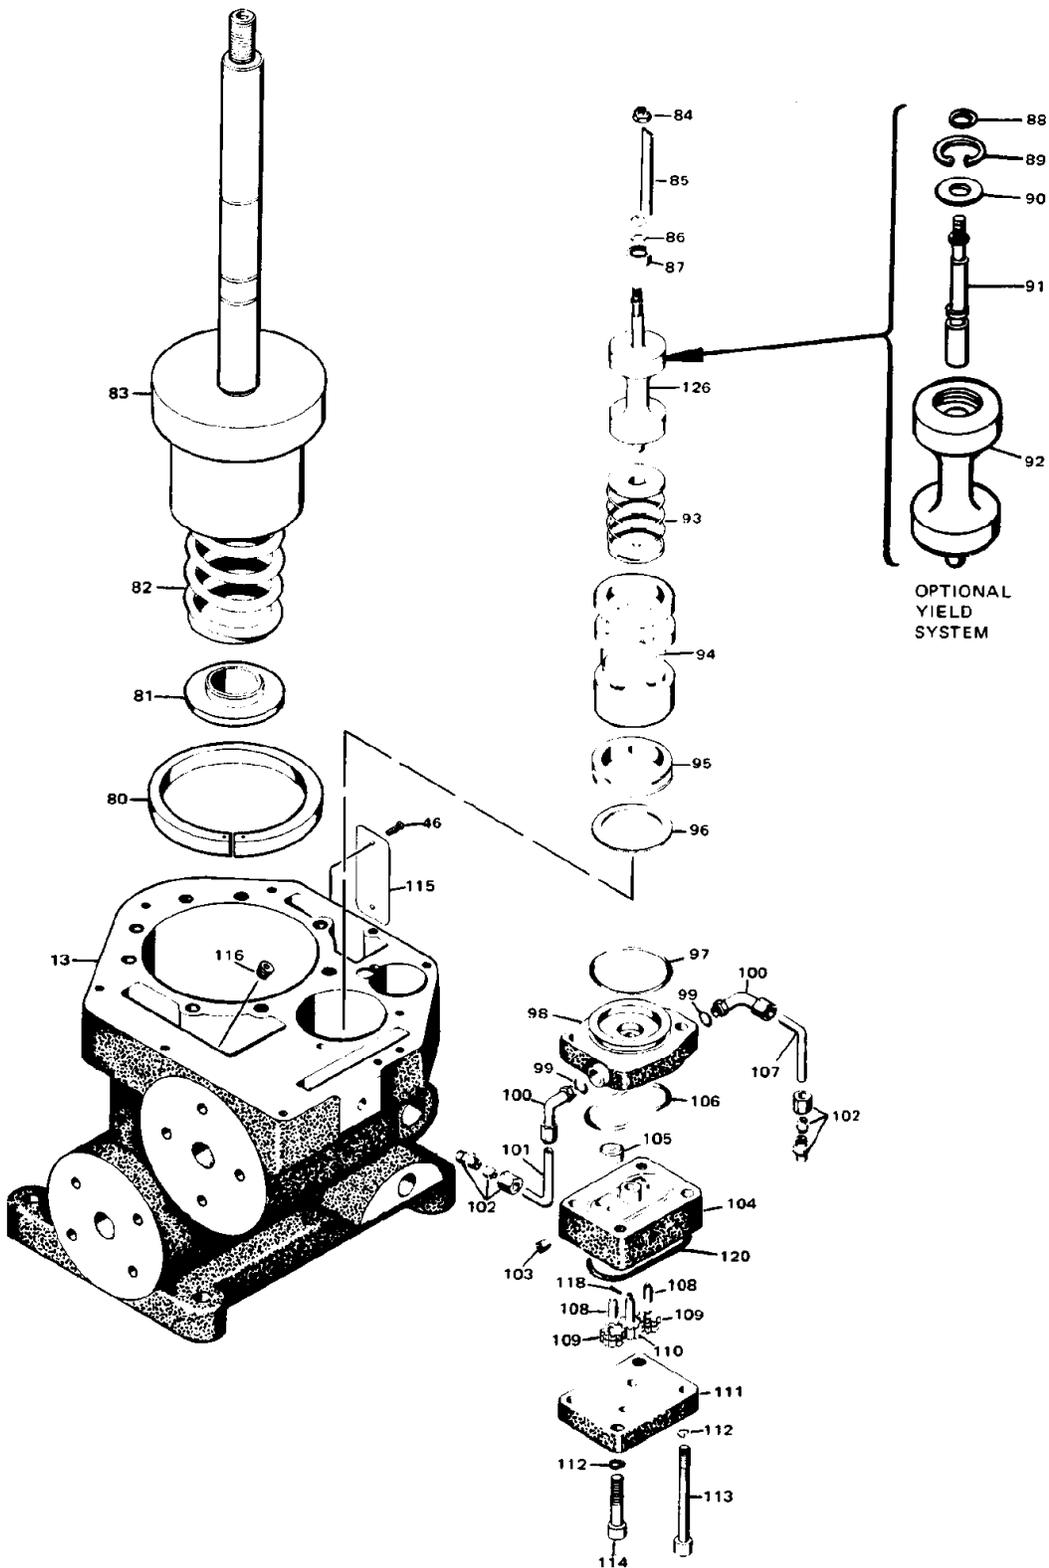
Exploded View of the Hydraulic Amplifier
